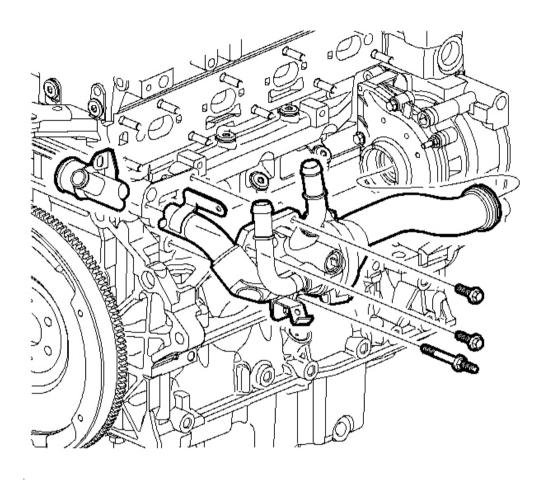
View Of Thermostat Housing Bolts Courtesy of GENERAL MOTORS CORP.
